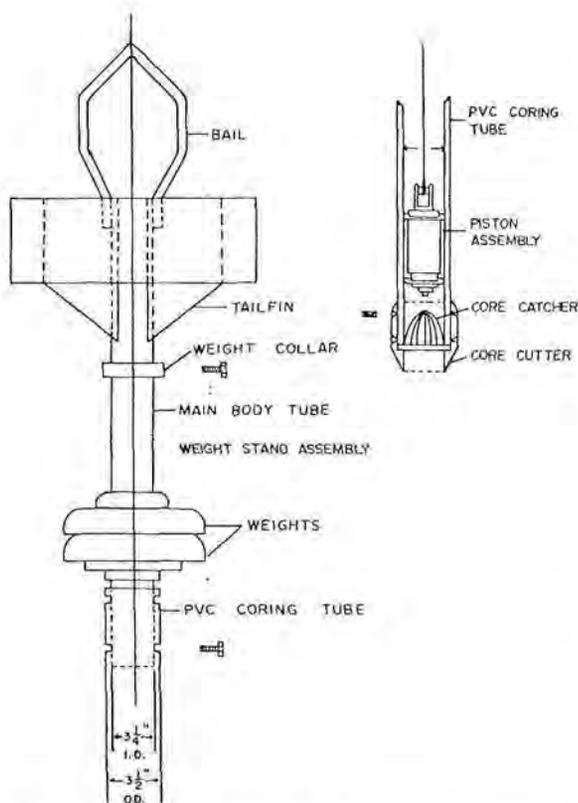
The Hydro-Plastic (PVC) piston corer assembly.
